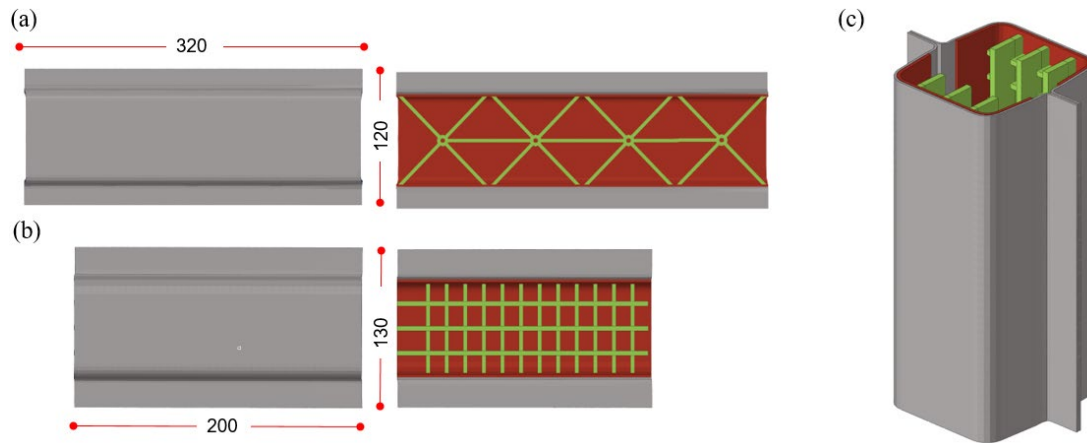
(a) Hat shaped section for 3-point bending tests, (b) Half hat-shaped section for axial crash tests (c) Assembled two halves of hybrid hat profiles
